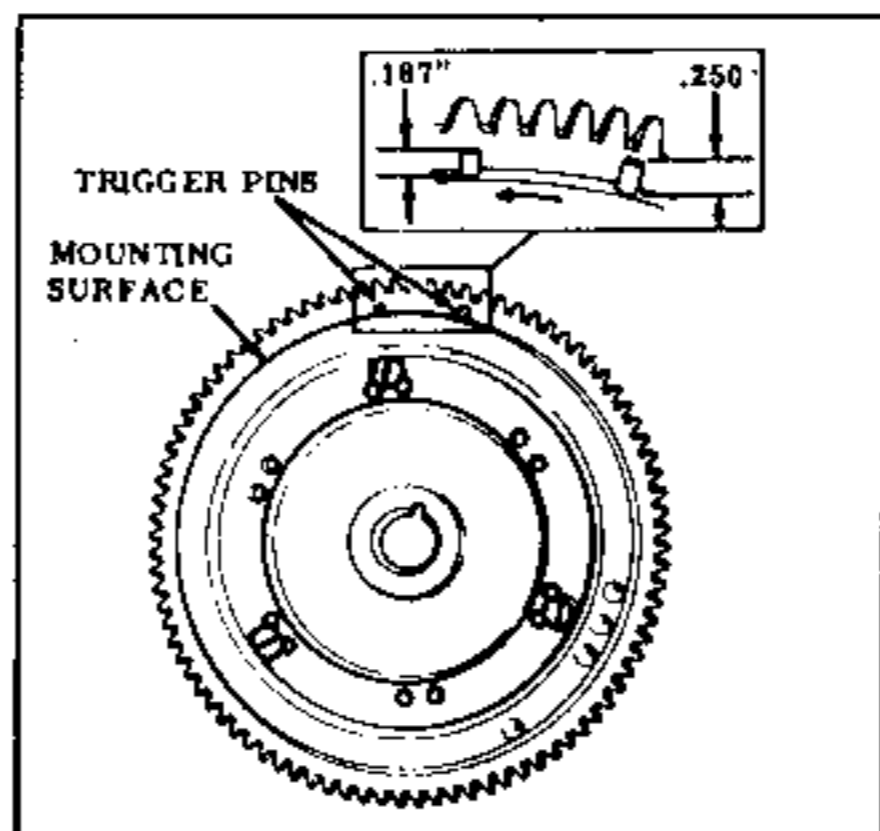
Remove flywheel and drive trigger pins in or out as necessary until long pin is extended 0.250 inch (6.35 mm) and short pin is extended 0.187 inch (4.75 mm) above mounting surface.
